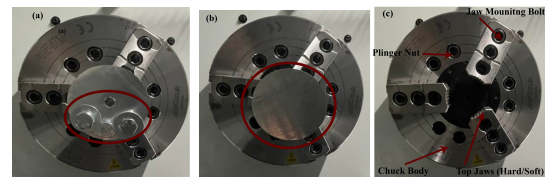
Clamping vibration test conditions for the spindle (a) Clamped work piece without eccentricity (b) Clamped work piece with eccentricity (c) Unclamped Workpiece on Spindle
